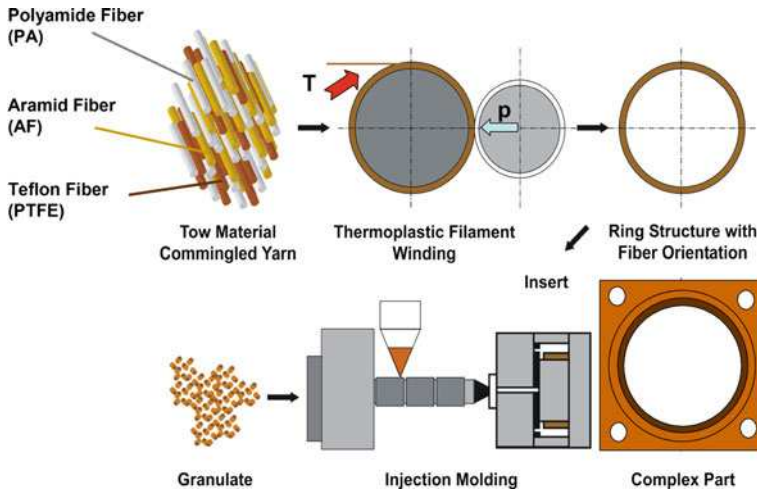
Principle processing steps for producing filament wound thermoplastic bushings or flange bearings
